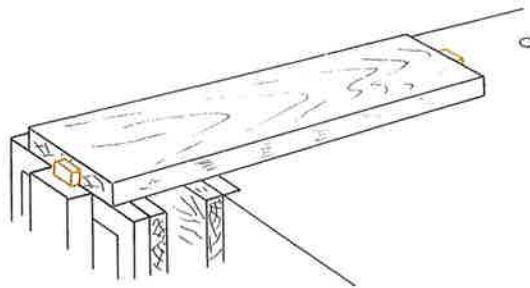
Board fastened on bench against a bench stop, ready for planing.
